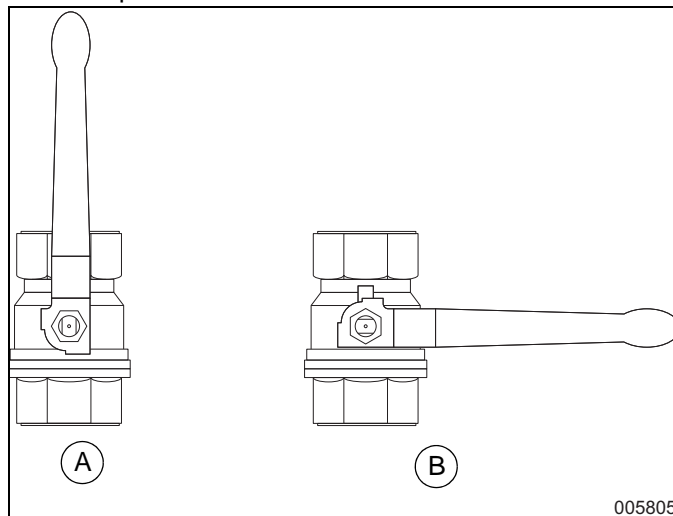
Opened Valve (A) and Closed Valve (B)
